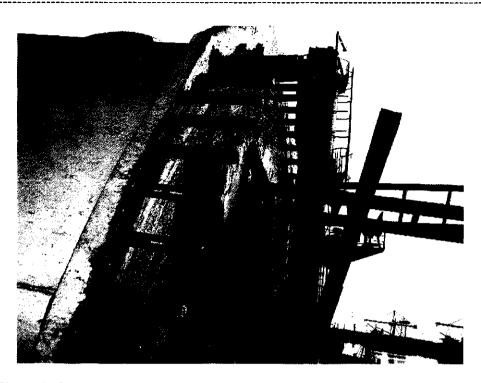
, Close-up view of crane tower showing some of the failed stud joints in way of area of fractured slewing ring.
